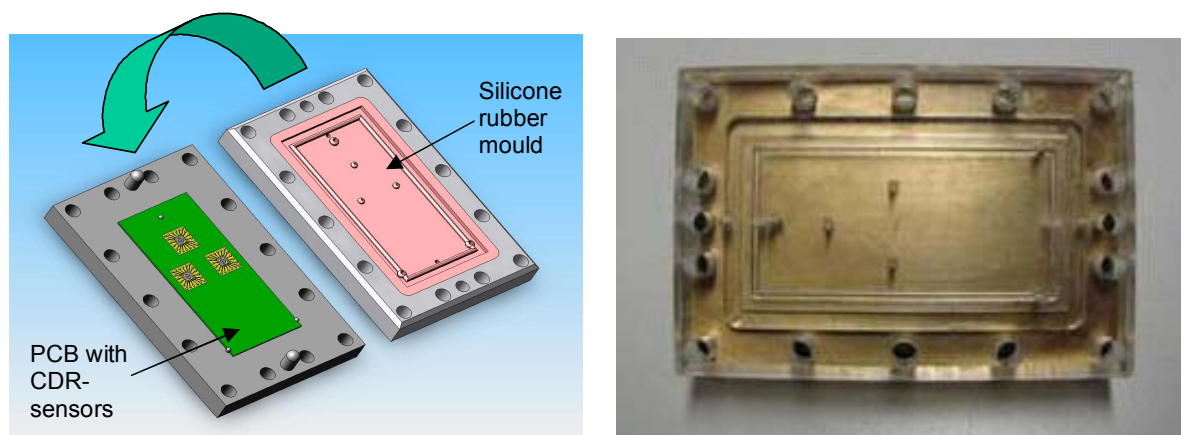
Device for the coating of the CDR PCB carrier with epoxy, while leaving the CDR sensor membranes uncovered. Left: schematics. Right: Photograph of the mould. One part of the mould is transparent in order to allow checking for air bubbles
